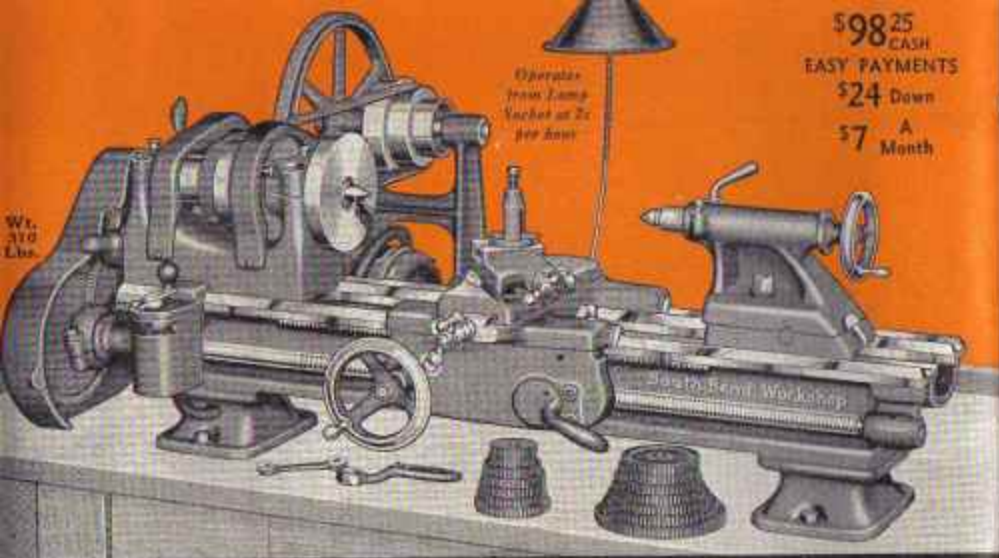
9-inch x 3-ft. "Workshop" Bench Lathe with Plain Type Horizontal Motor Drive Countershaft, Motor, Switch and Lathe Equipment, But Less Bench.....\$98.25
